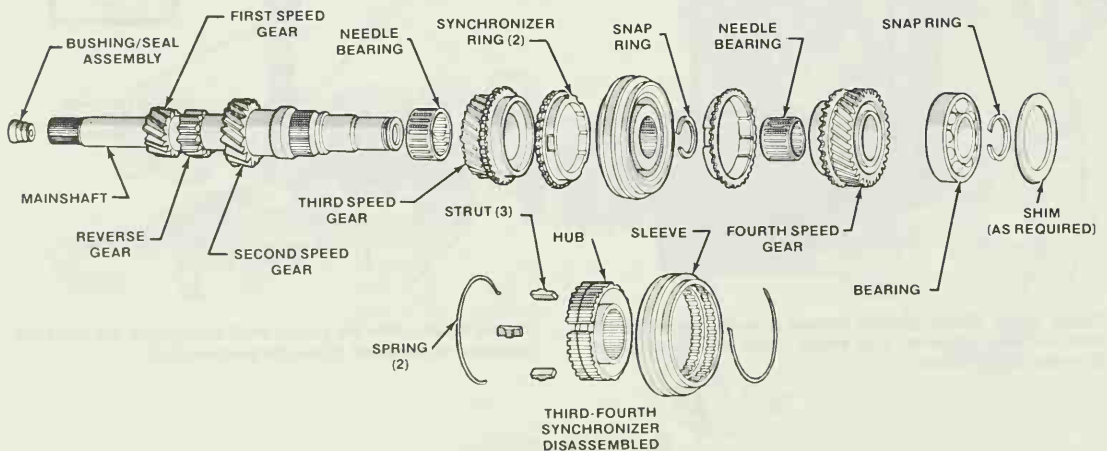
Parts which are assembled on the mainshaft. (Chrysler Corporation)
